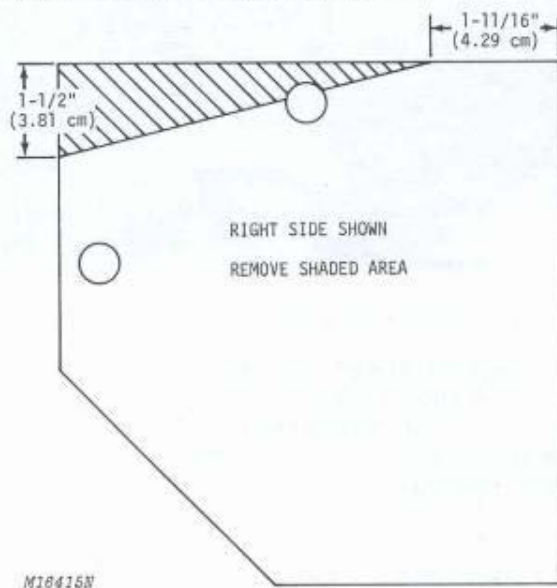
B-Area to be Trimmed from Front Mounting Bracket
